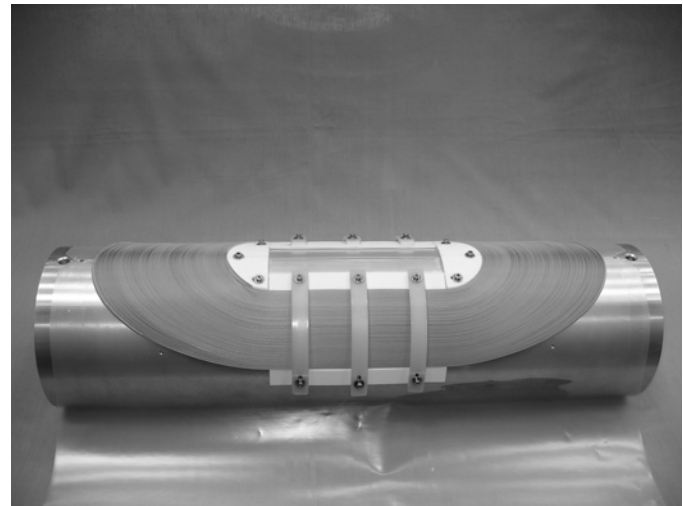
Saddle coil just after 3D bending, before impregnation, on the bending former.
